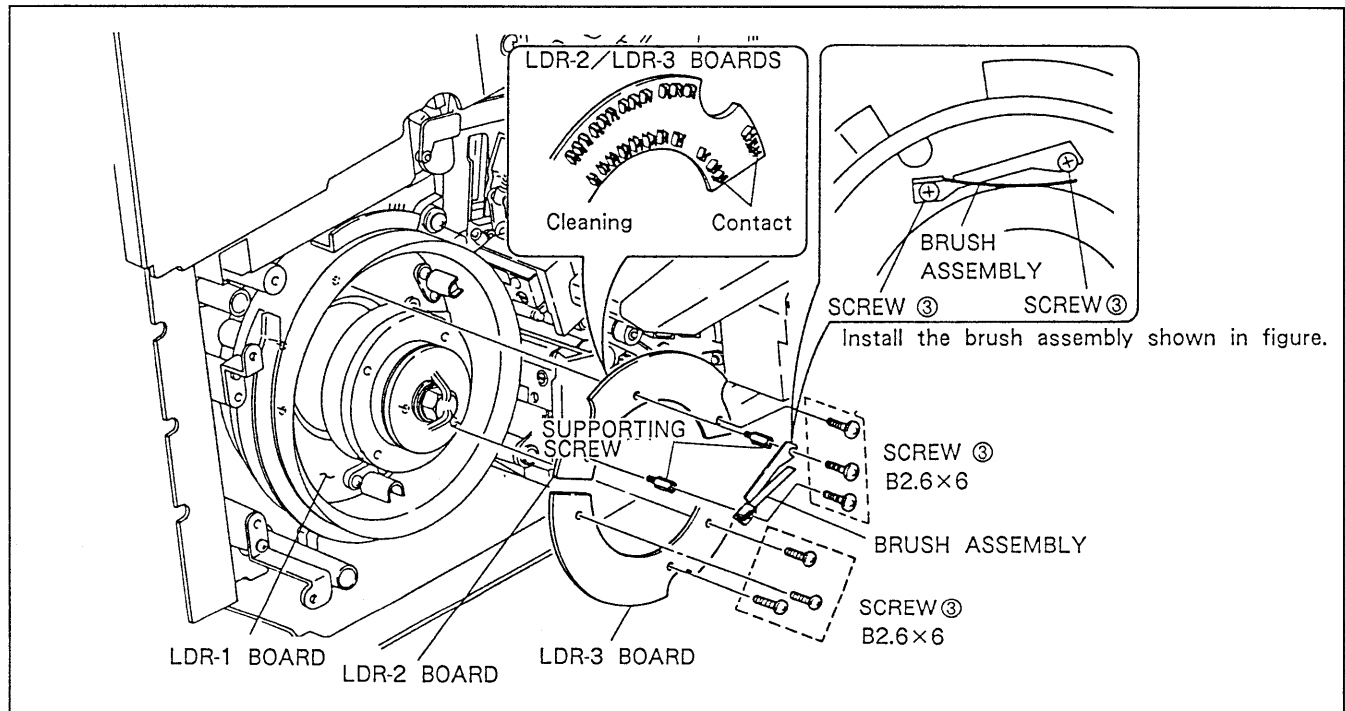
LDR-2 and LDR-3 Boards Replacement
